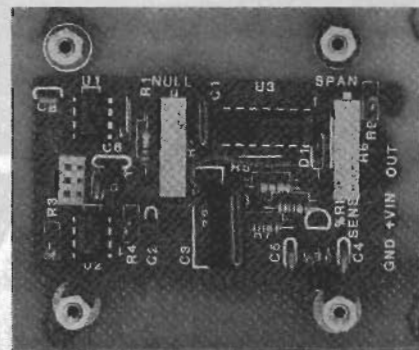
YOUR COMPLETED PC BOARD for the humidity monitor should appear as shown here. Interconnecting wires attach to the bottom of the board.
